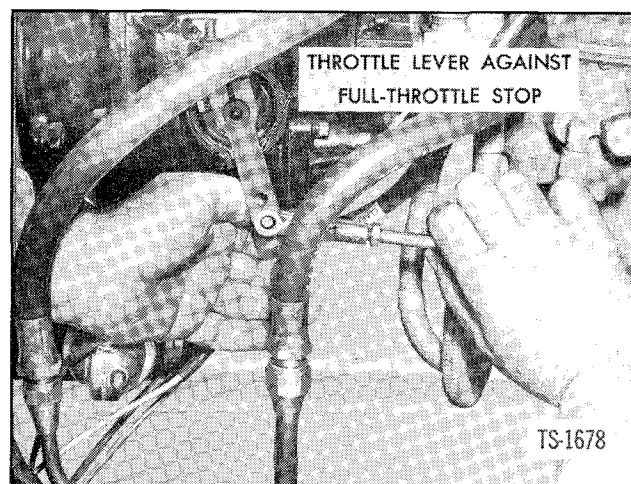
Adjust Throttle Linkage (Cummins Diesel)
